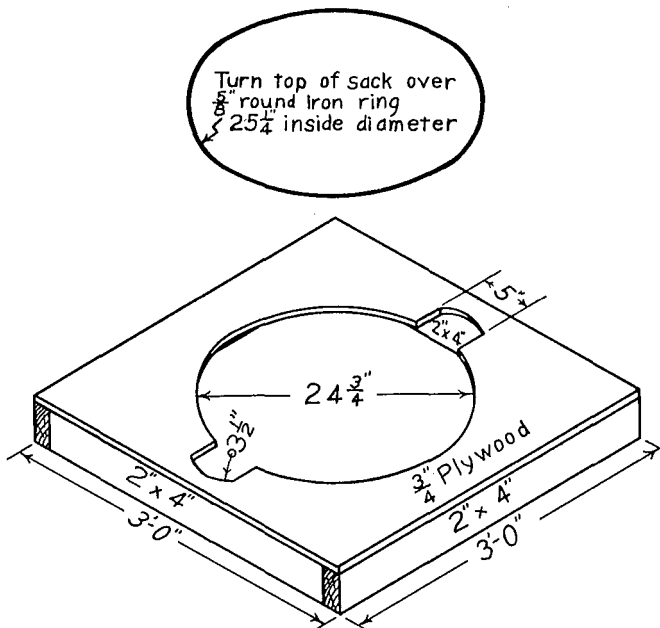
A wool sack holder is necessary if many fleeces are handled. Sacking is made easier, more fleeces are packed per sack, and the wool is kept in better condition.
